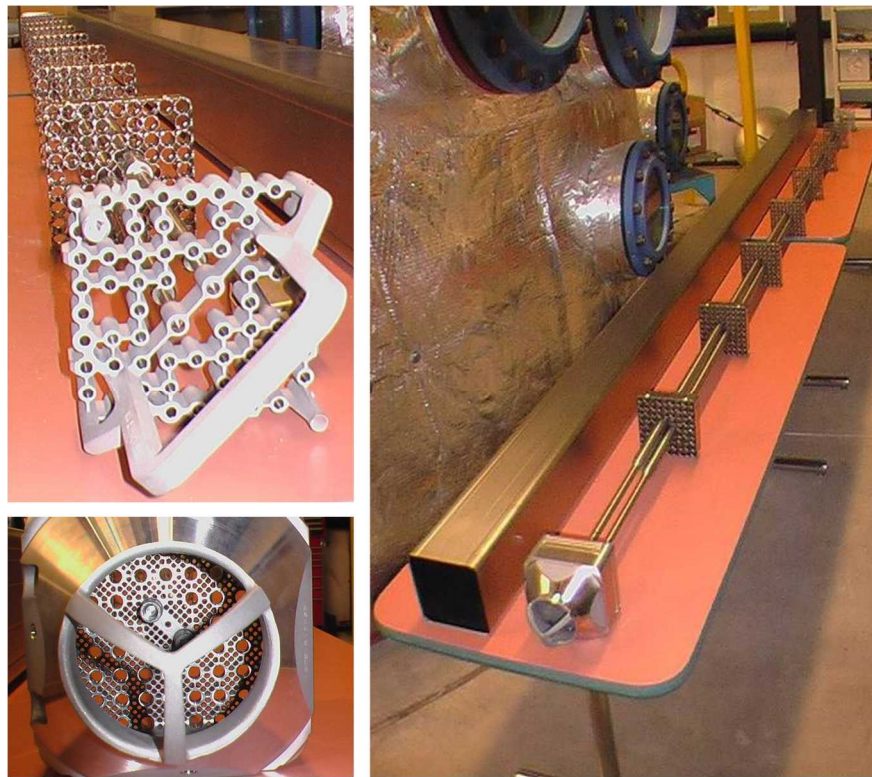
Typical 9×9 BWR components used to construct the test assembly including top tie plate (upper left), bottom tie plate (bottom left) and channel box and spacers assembled onto the water rods (right).
